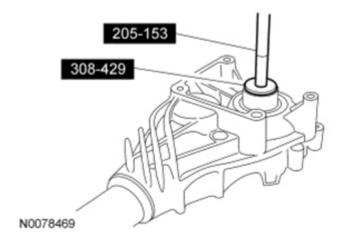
Installing Intermediate Shaft Seal Using the Handle And PTO Driven Gear Oil Seal Installer
